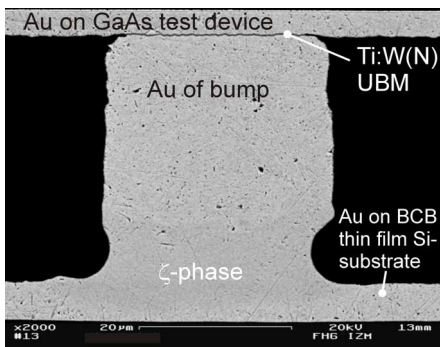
Cross-sectional SEM image of a flip-chip bump interconnect after assembly.
